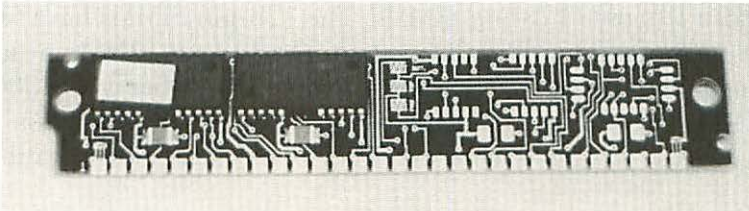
SOJ SIMM PCB layouts vary from manufacturer to manufacturer.
